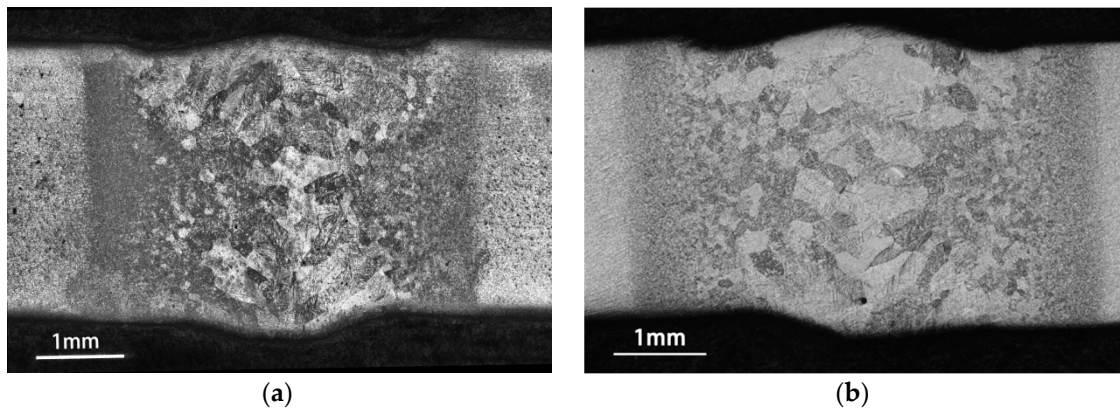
Cross sections of laser welds (laser power: 2.5 kW; traveling speed: 20 mm/s). (a) Flat welding; (b) Horizontal welding.
